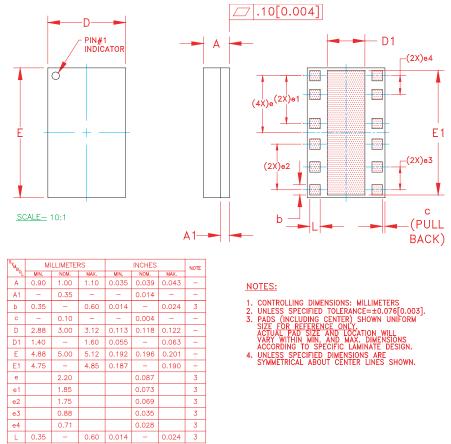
Package Outline - 12 Pin 3 mm x 5 mm x 1 mm Surface Mount Module
